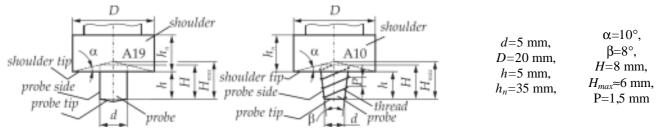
Schematic of welding tools [2] used in experimental studies
